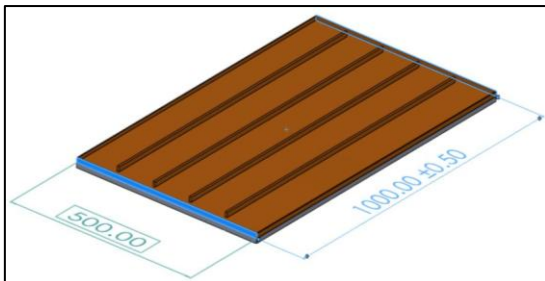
Sheet and tube water thermal collector dimensions and geometry
